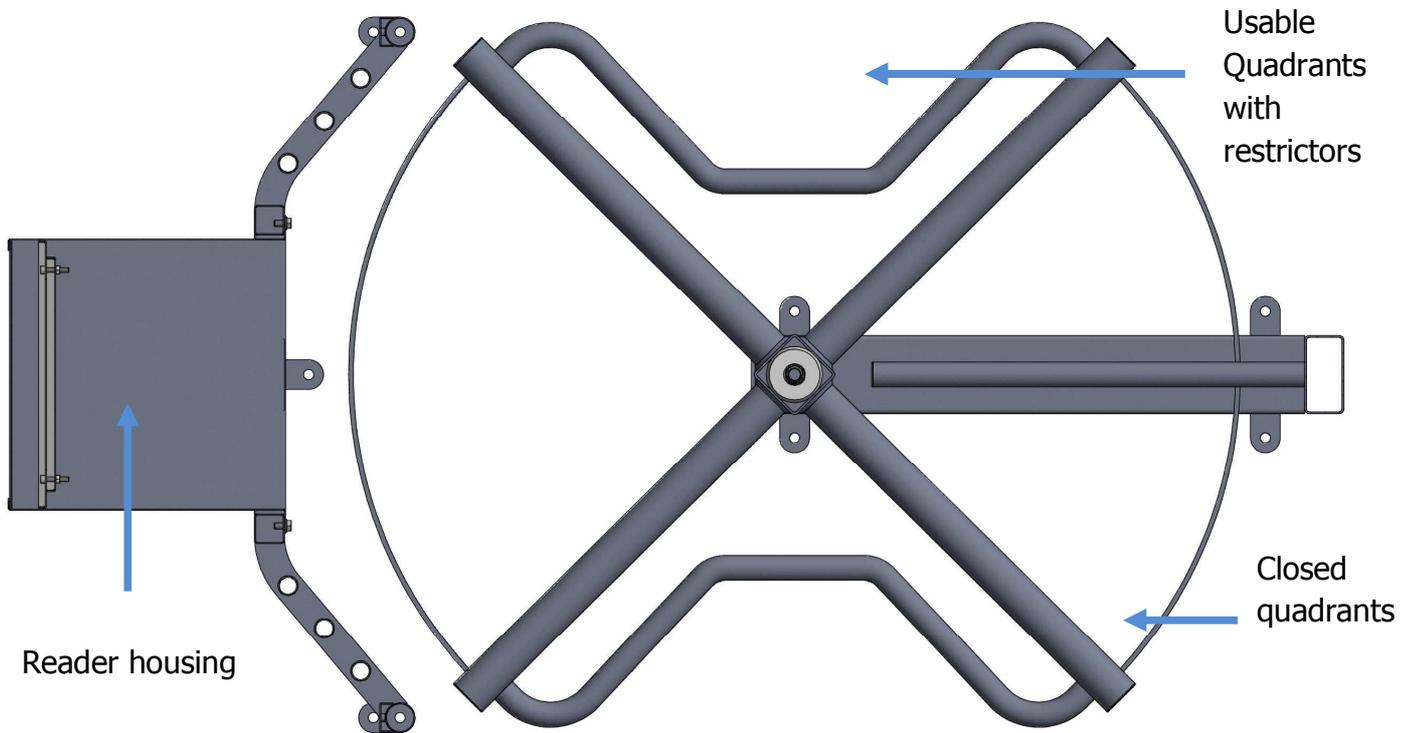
Section over Reader Housing, Rotor shown in open position
